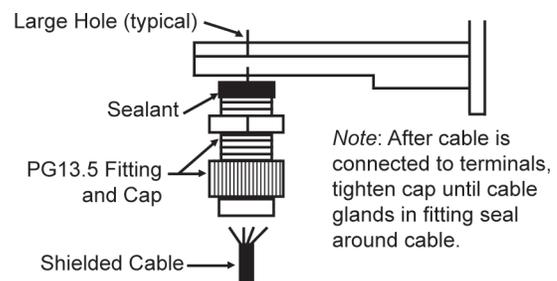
Inserting Shielded Interconnect Cable Through PG13.5 Fitting and Cap.
